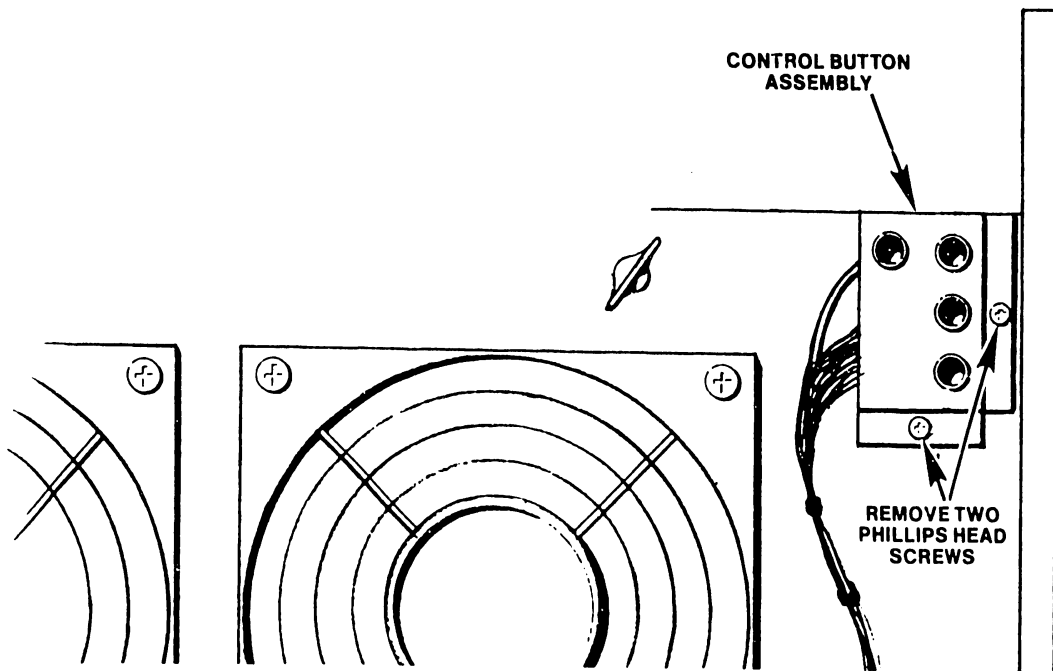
CONTROL BUTTON ASSEMBLY REMOVAL
